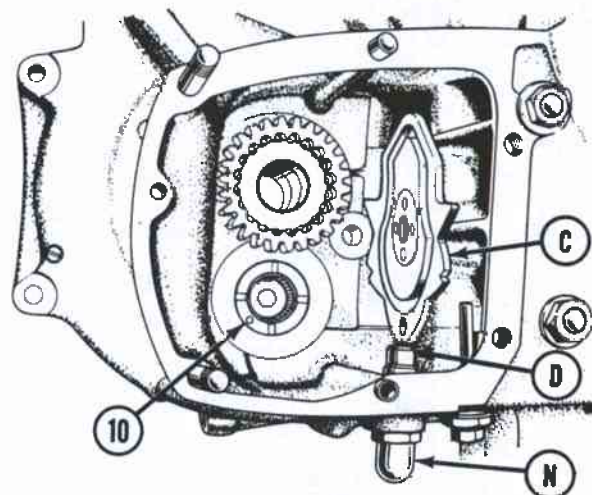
The kick starter return spring should be installed on spline shown.
